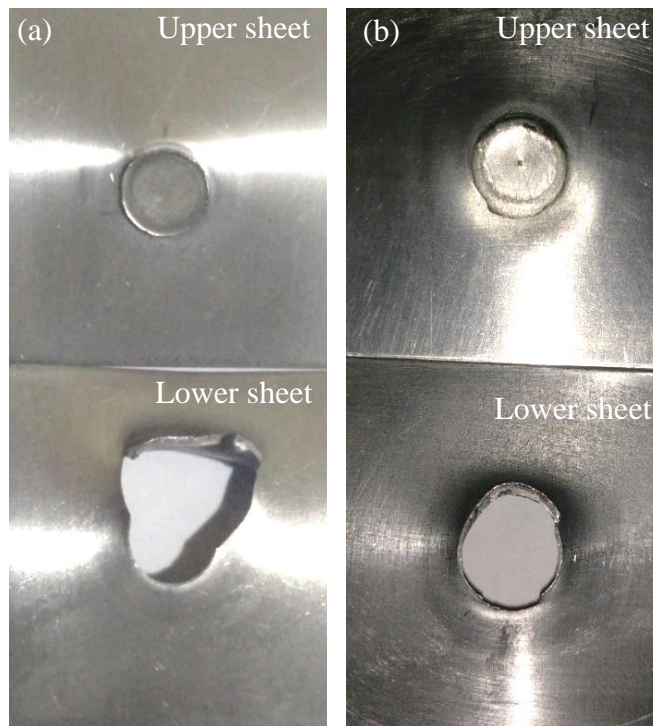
Examples of the failure behaviour, showing both halves of the fractured lap shear test samples welded using welding parameters of 2000 rpm, 1.0 s, and 1.0 mm. The samples were tested in the (a) as-welded condition, and (b) after artificial ageing at 180°C for 30 min.
